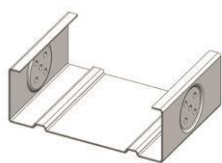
DETAILS OF LOAD-BEARING STEEL CONSTRUCTION ELEMENTS
